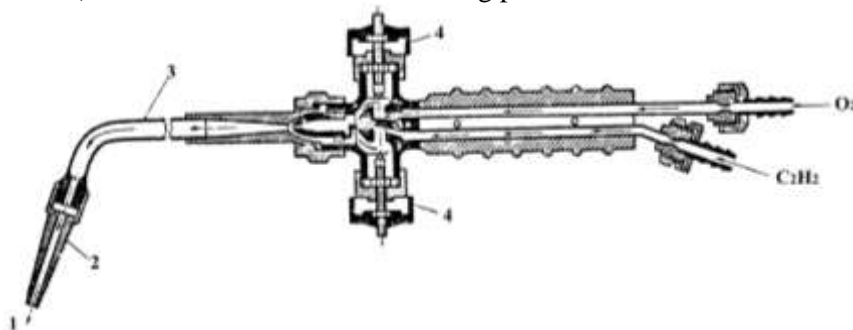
Gas welding torch: 1 –fuel mixture; 2 tip -; 3 – injector; 4 – valves
